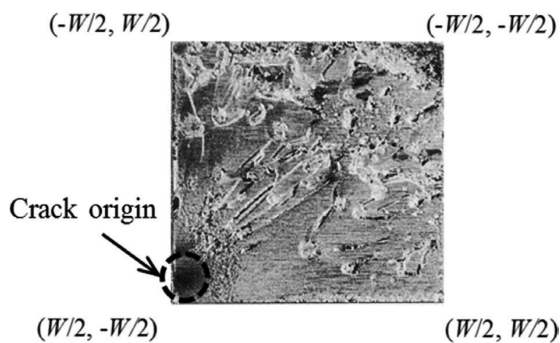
Fracture surface when $h = 0.1$ mm in Fig. 1(a)²⁷⁾
